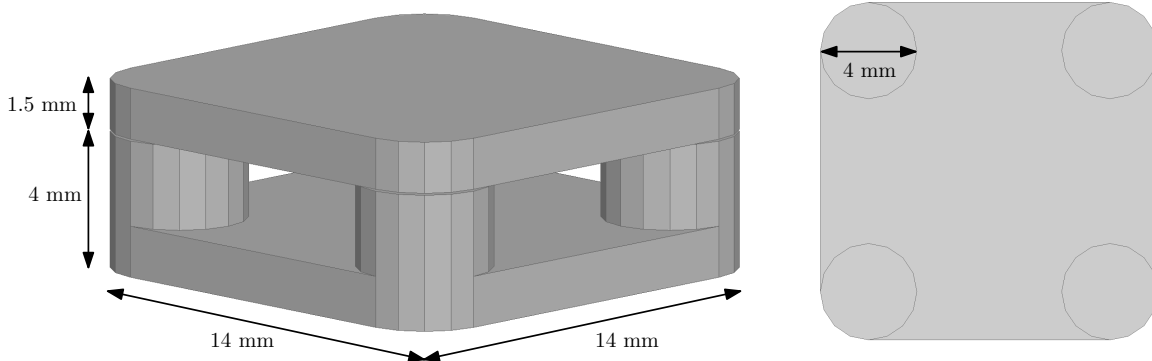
Ferrite core used to fully-couple the converter winding with dimensions. Isometric view (left) and top view (right).
